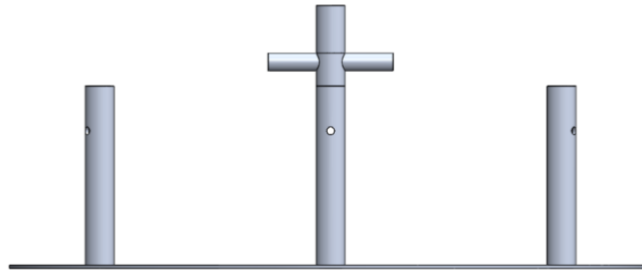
Side view of the stage 1 enhanced sprue bar rack design.
